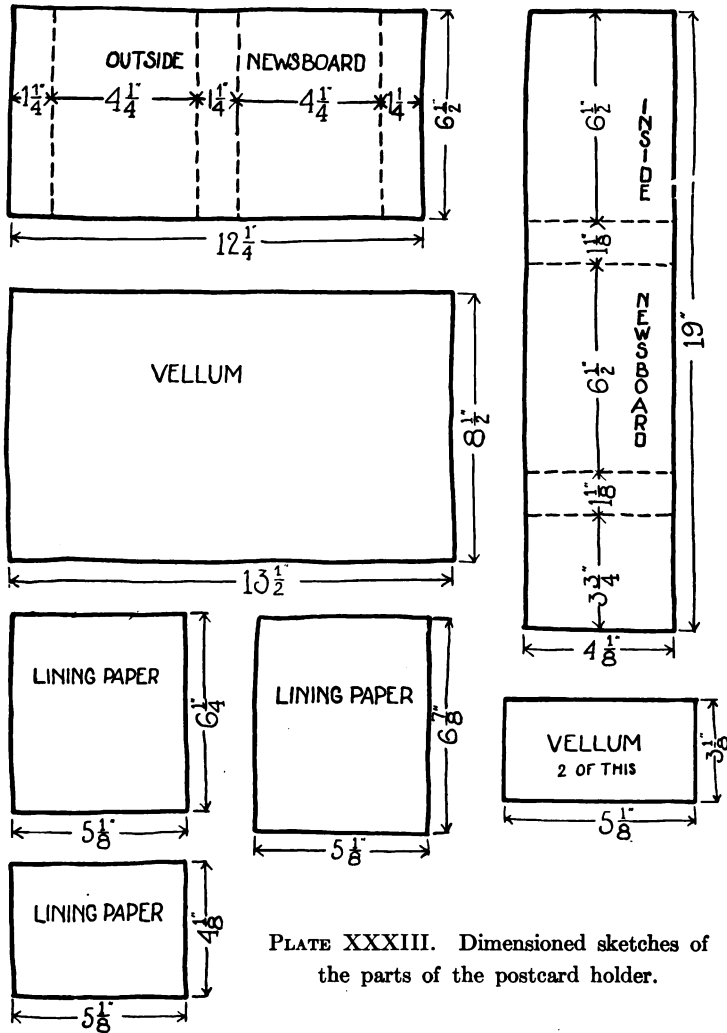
PLATE XXXIII. Dimensioned sketches of the parts of the postcard holder.
